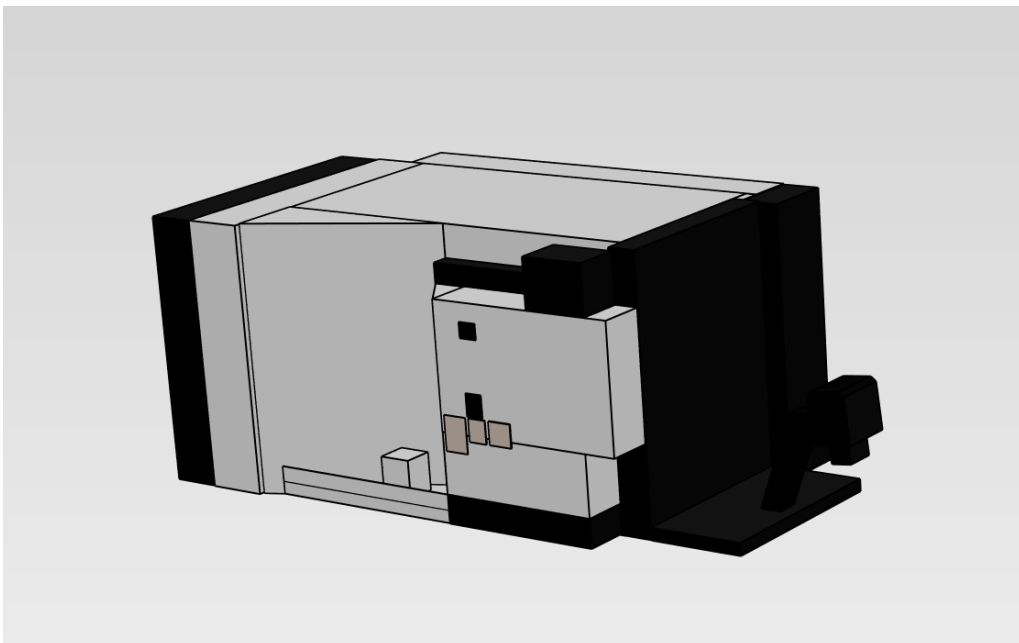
Second example of machine designed through reverse engineering using point clouds.
